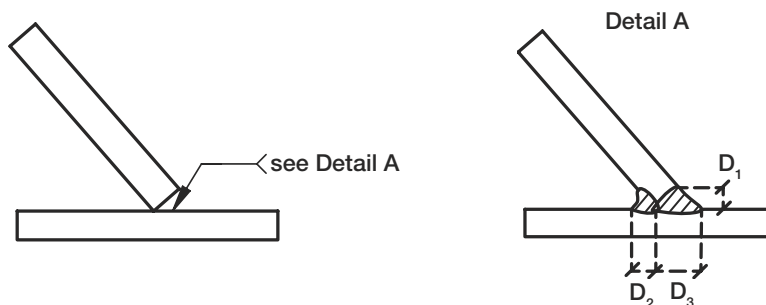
How to clarify a weld for a skewed T joint.
